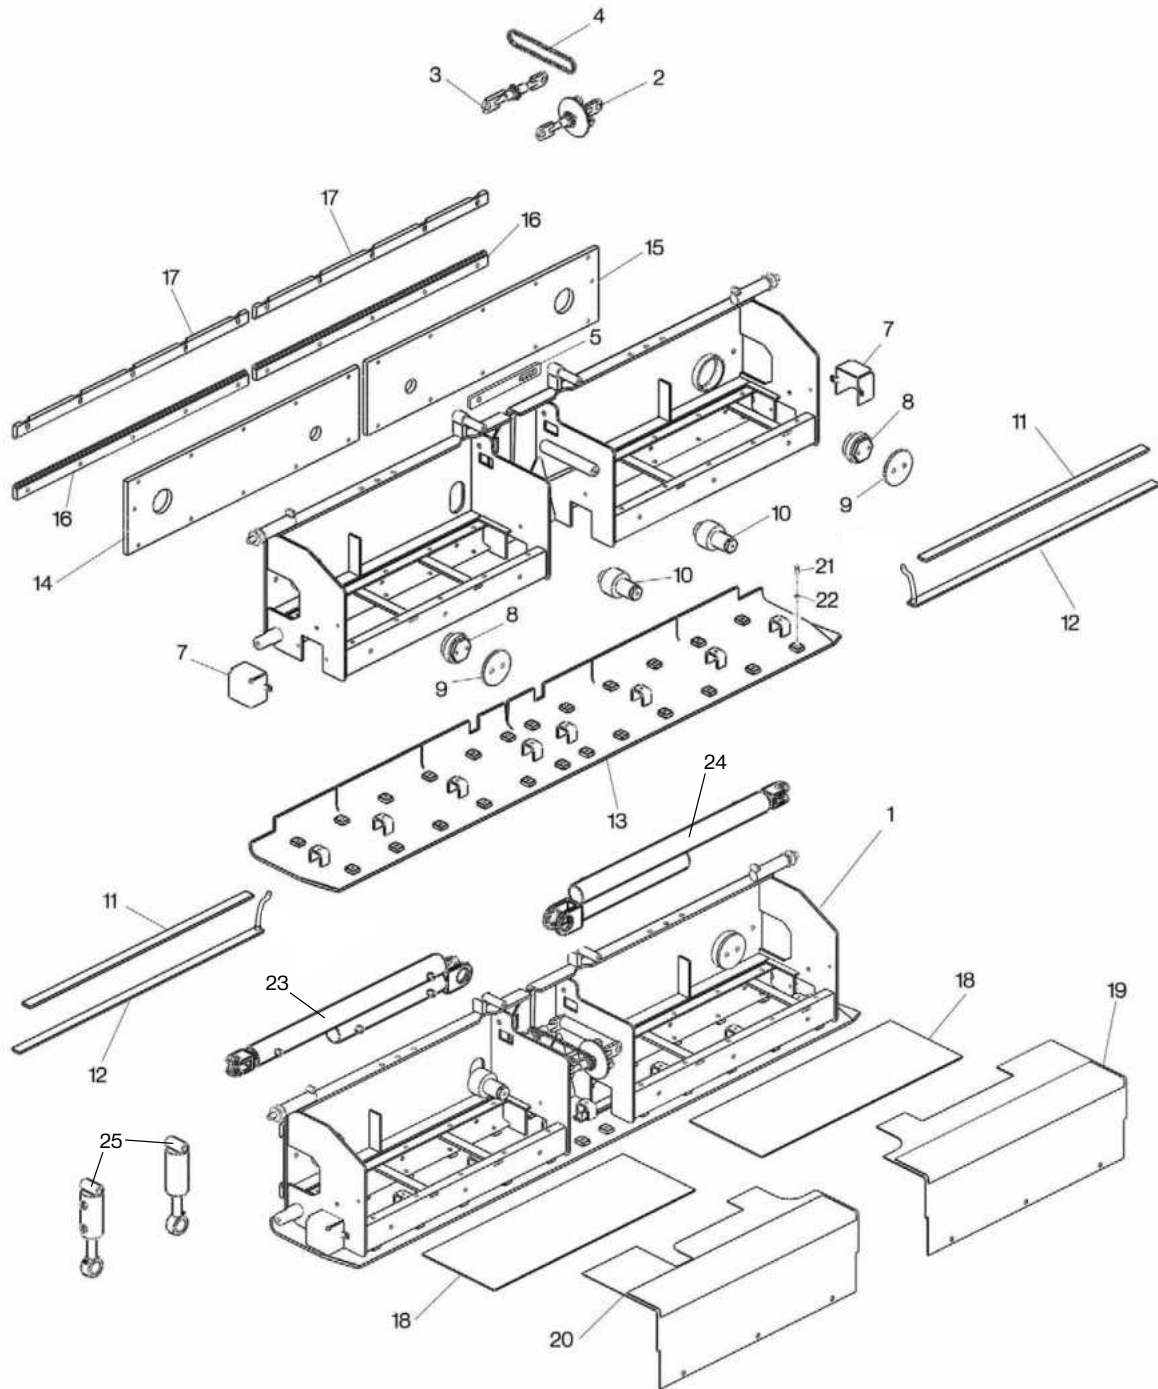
Option - Legend Sloping Screed Frame Assembly
